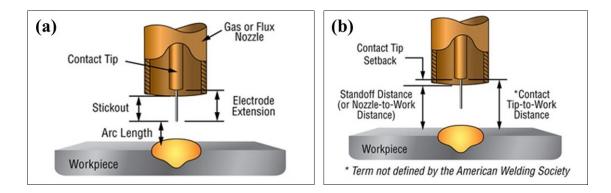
Schematic diagram of (a) stick out and electrode extension, (b) nozzle to workpiece distance and contact tip to workpiece distance.
